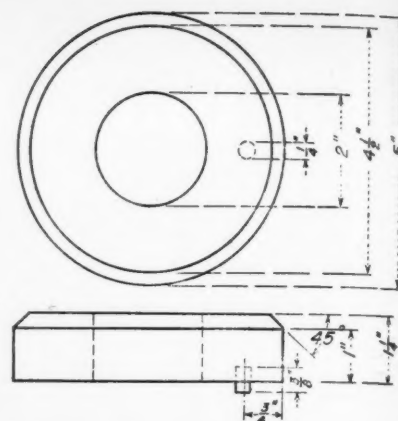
Construction details of the stationary hard maple friction block with its beveled bearing surface.
